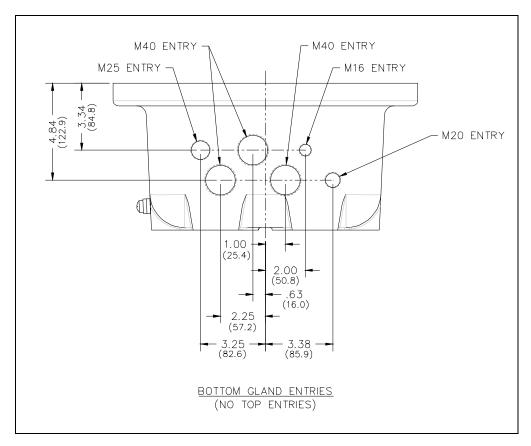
Model 7085-005-EX-F07050 Cable Gland Entries
